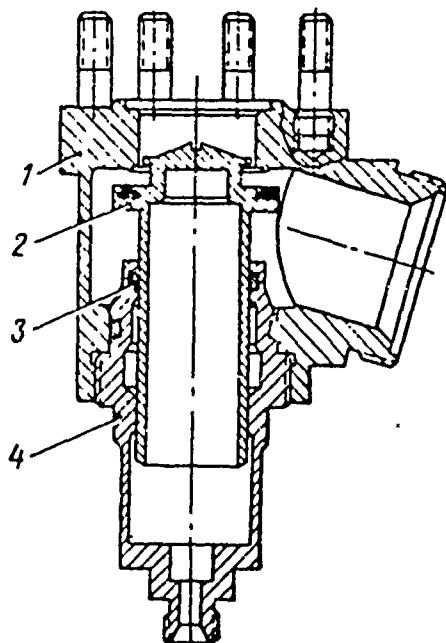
Valve simulator, designed for testing friction of seal rings: 1 - housing; 2 - valve; 3 - tested rubber ring; 4 - cover.
